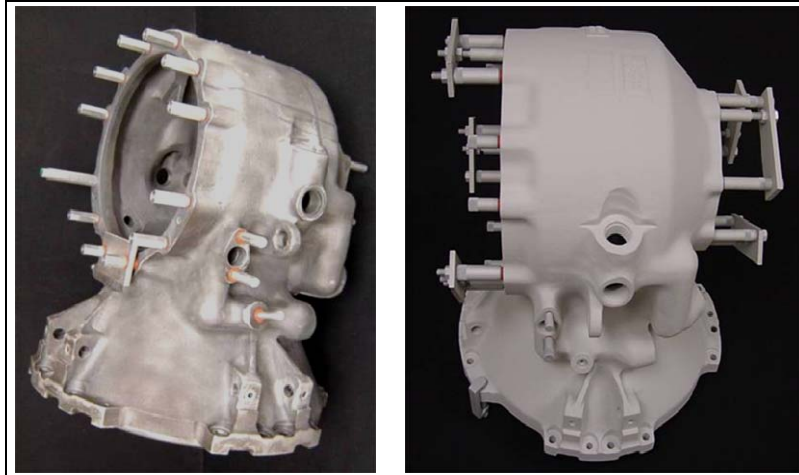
H-47 gearbox with aluminum masking installed. Left: aluminum stud covers with silicon O-rings. Right: aluminum press-in plugs with silicon O-rings, held in place with aluminum "bridges."
